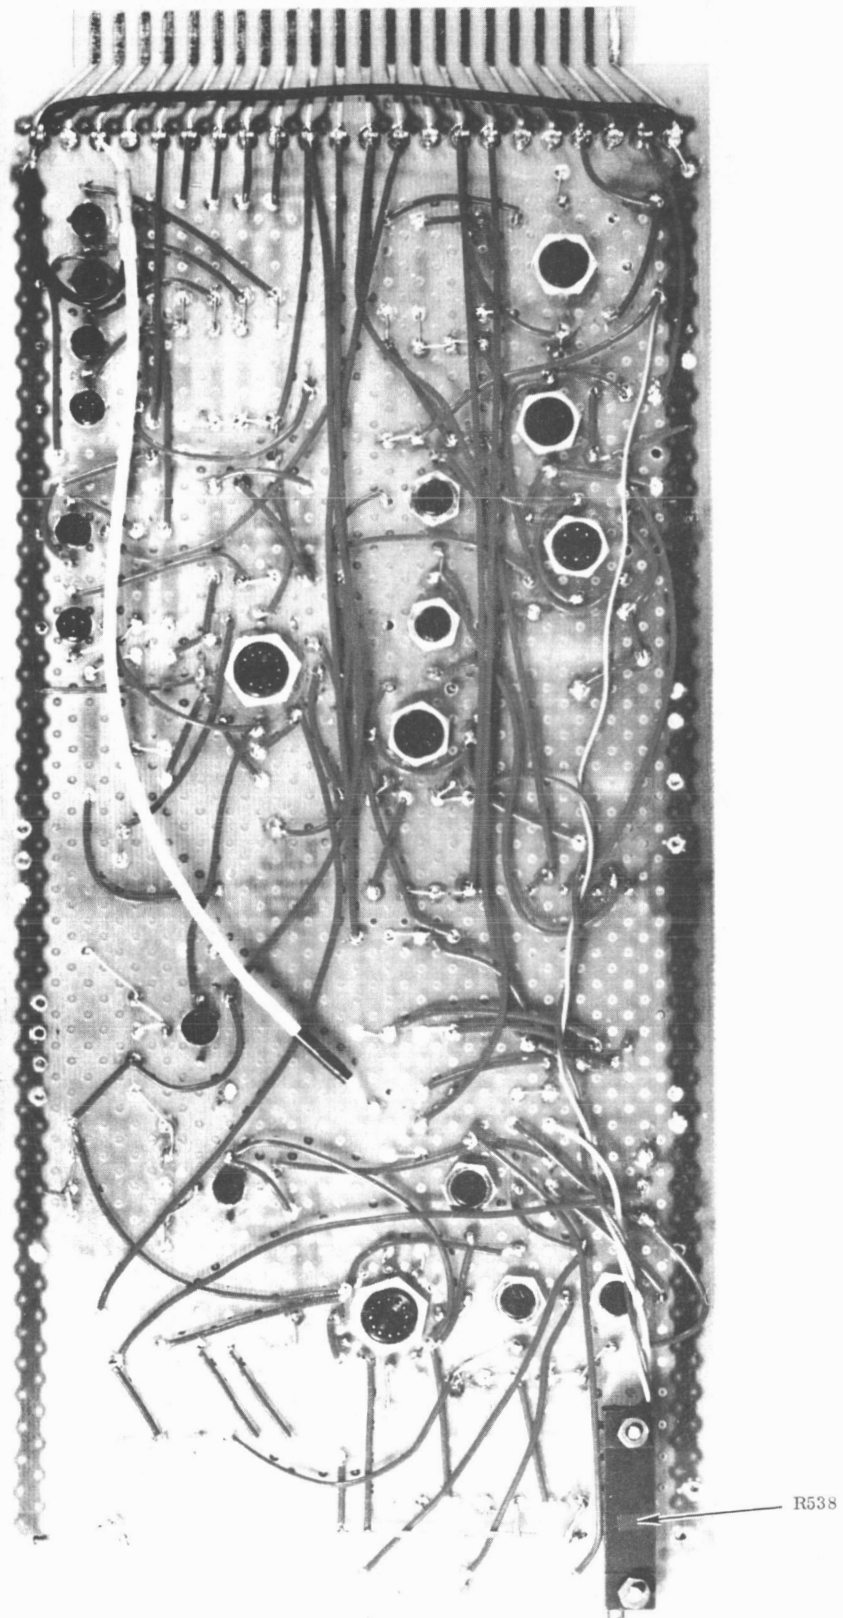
Bottom View Board 5 RF, Video and A/PW Converter
